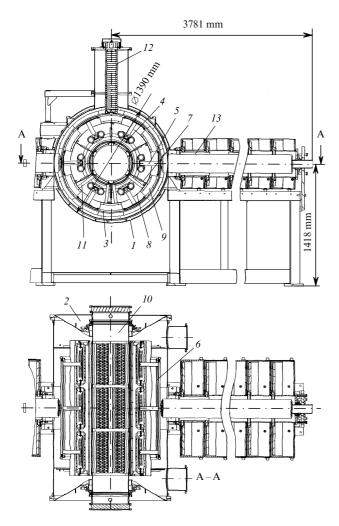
Scheme of a laser pumped by a radially converging electron beam using two linear transformers connected in parallel: (1) vacuum chamber; (2) side flanges; (3) collector; (4) cathodes; (5) cathode holders; (6) plates for feeding the current to the cathodes; (7, 8, 9) magnetically insulating reverse-current plates; (10) cell; (11) lodgements; (12) springs; and (13) high-voltage turn of the transformer.
